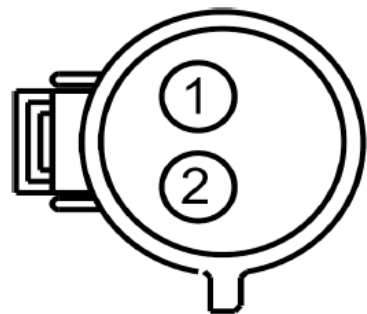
Four Wheel Drive Control Module Connector End View (C3253)
